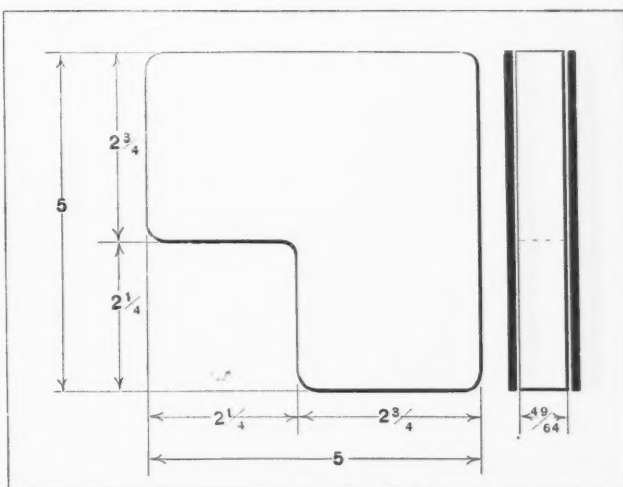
Toggle Base Milled in Fixture Shown in Fig. 1
